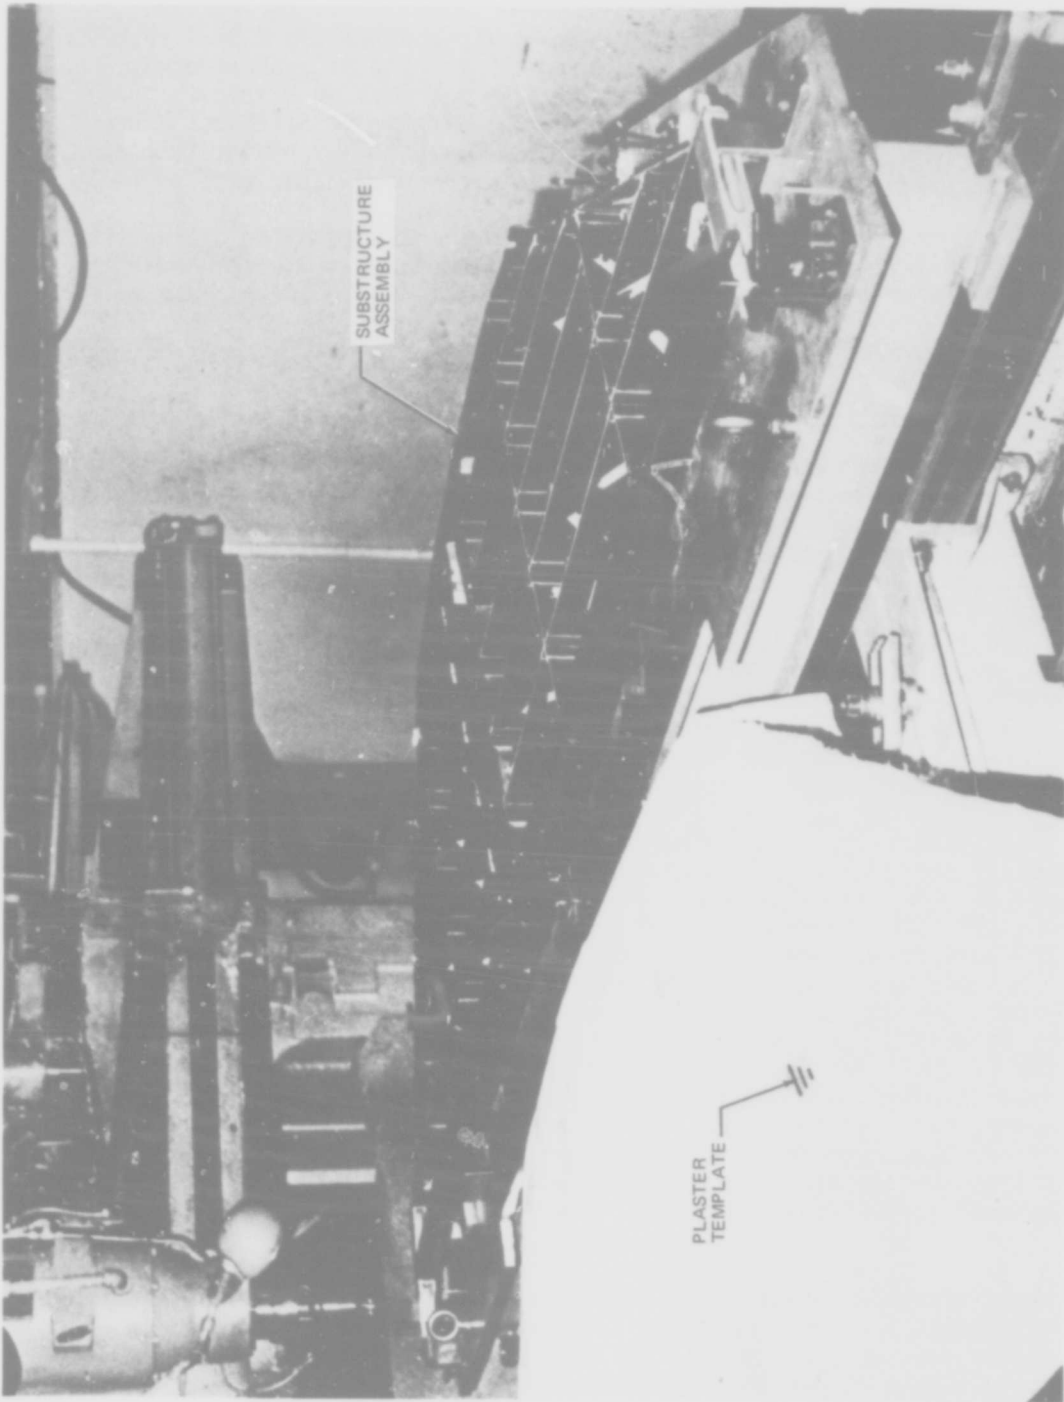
CONTOUR MACHINING SETUP FOR SUBSTRUCTURE ASSEMBLY
